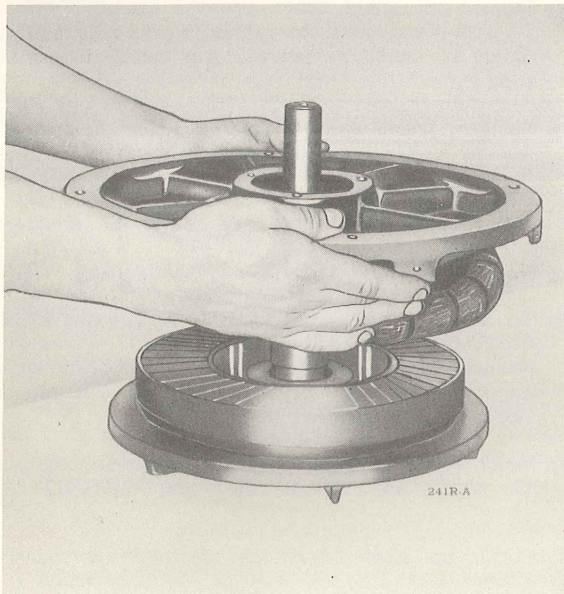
Assembling the Stator and Rotor After the Rotor Bearing is in Place
